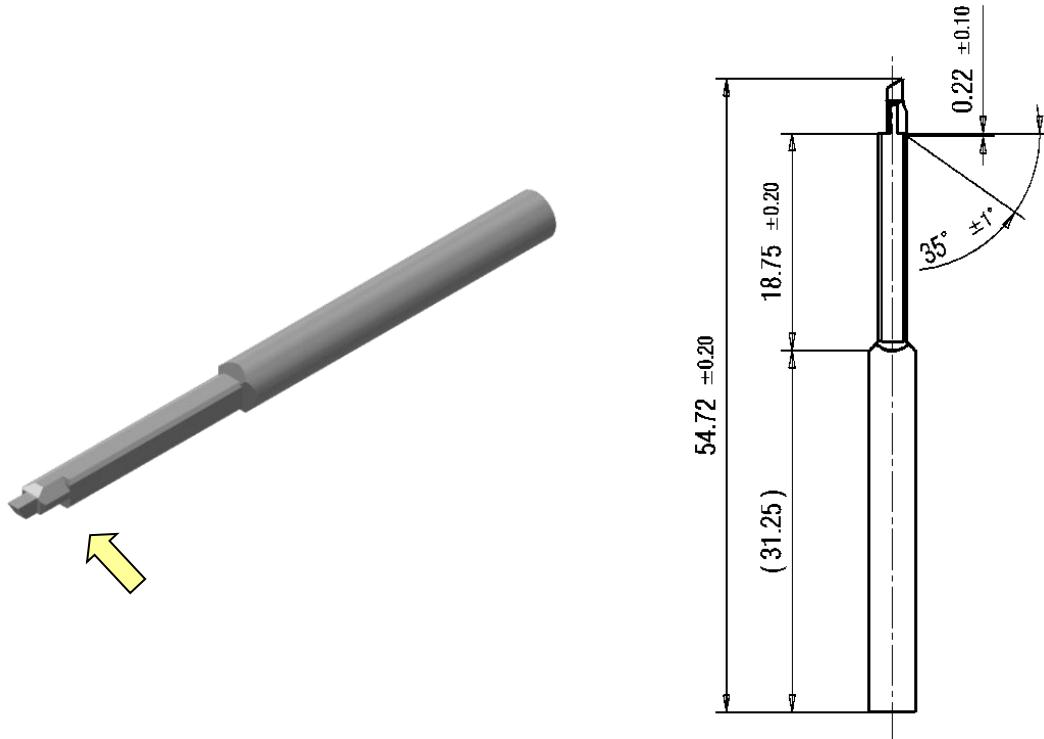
1.2 terminal removal tool / Outil d'extraction des contacts 1.2
